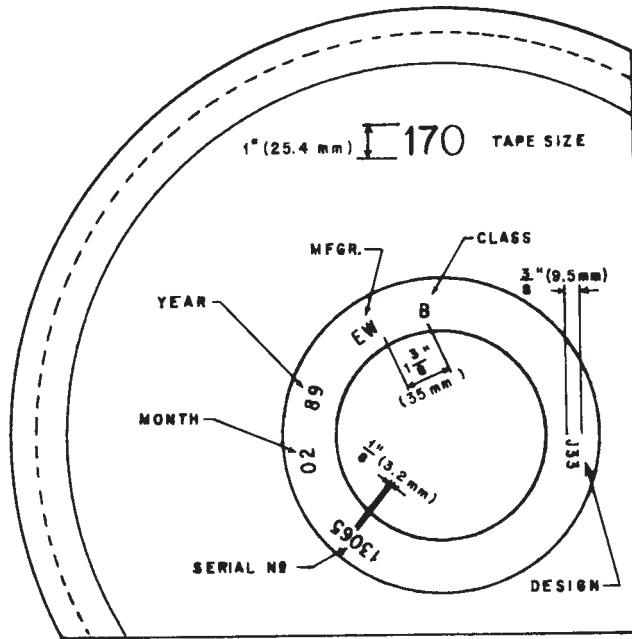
Marking of Wrought Steel Locomotive Wheels—Rim Stamping
